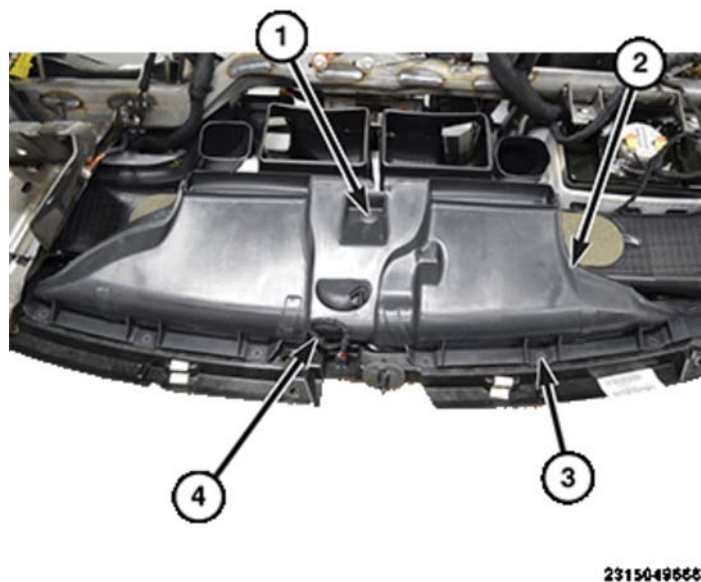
Push Fastener, Defroster Duct, Screws & Wire Harness
